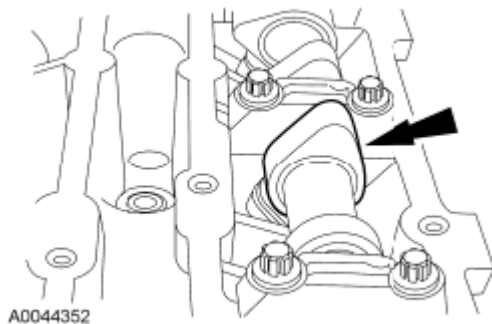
Identifying Camshaft Lobes Position On No. 1 Cylinder
